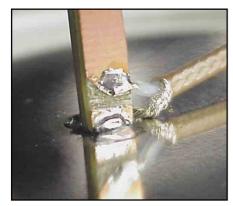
Close-up view of the coax connection to PCB transmission line and support.
